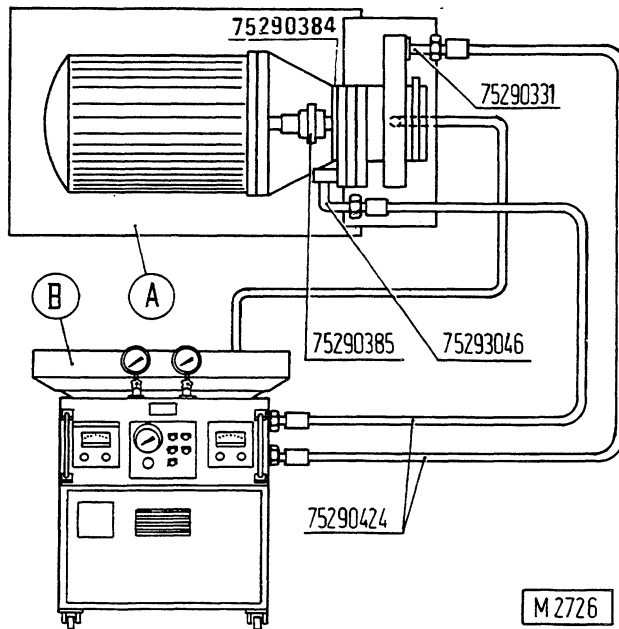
Transmission/master clutch charging pump output test set-up.
